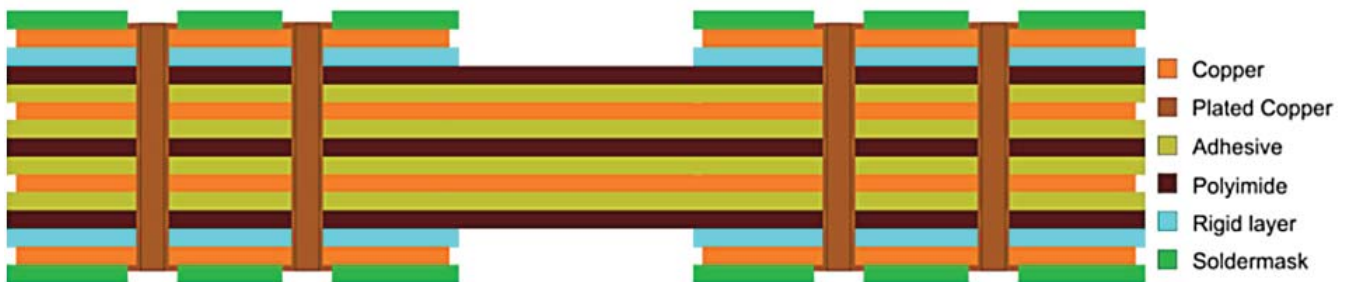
PCB design software should let you work with the entire assembly. Here, the rigid PCBs are on either end, connected by a two-layer flexible circuit.
